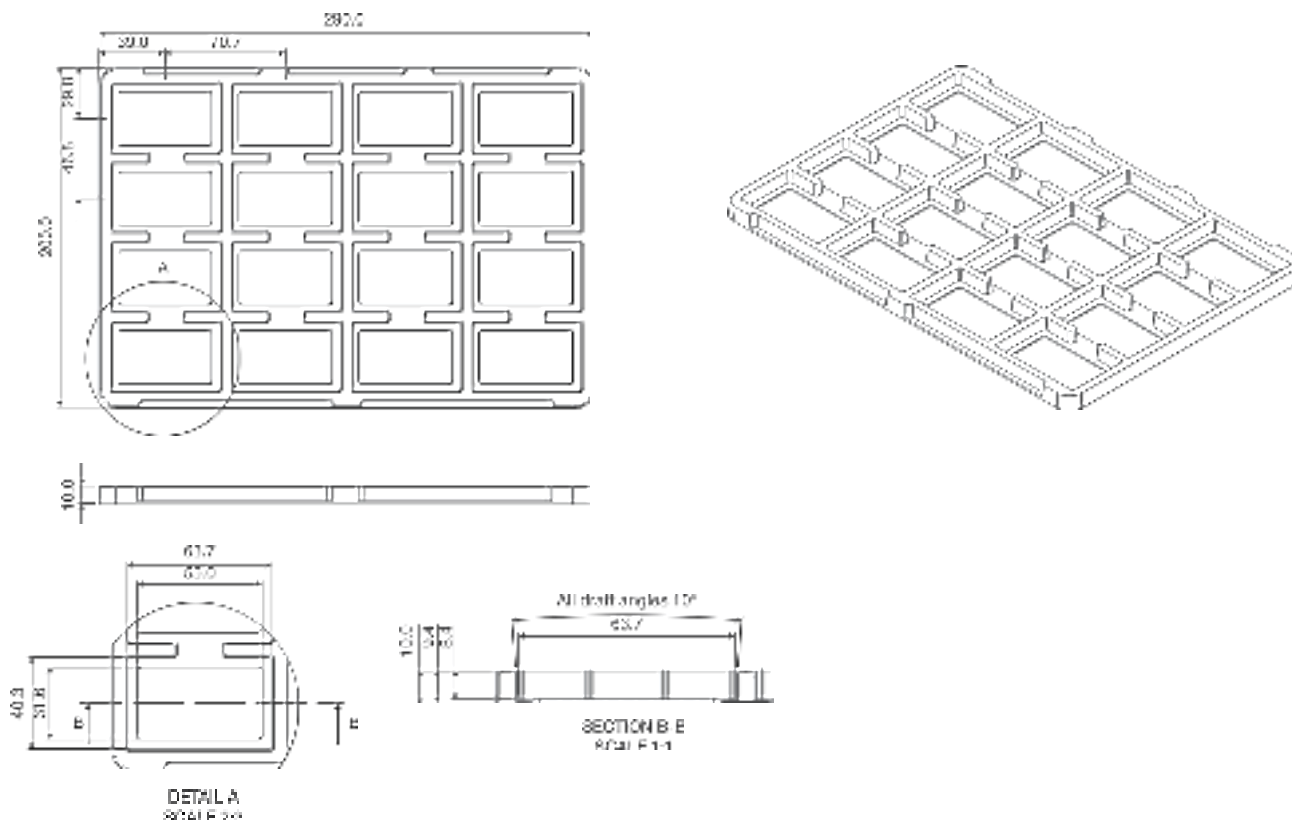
STANDARD PACKAGING BOX DIMENSIONS
